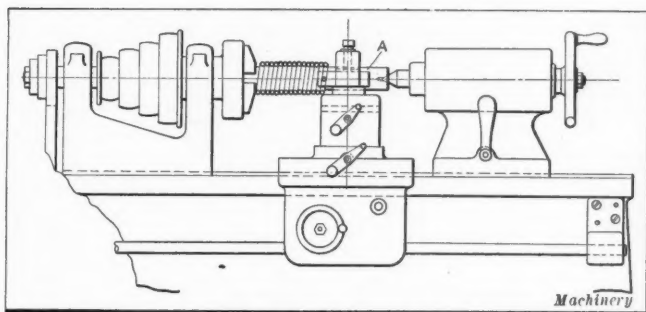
Winding a Coil of Chain Link Blanks in the Lathe
